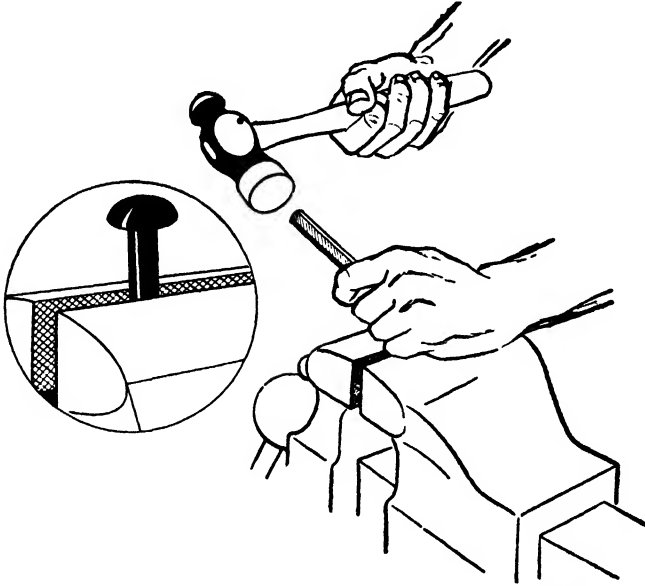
Rivets may be cut to length easily by clamping in a vise and shearing with a sharp cold chisel. Placing the hand over the top of the rivet keeps it from flying away and being lost as it is cut off.
